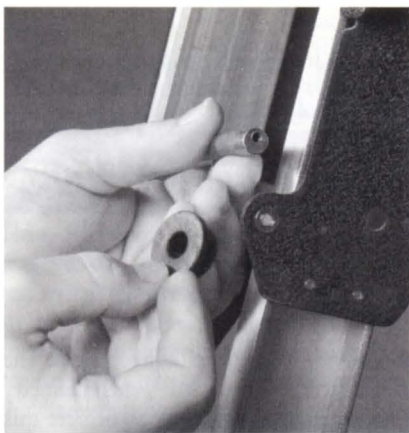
A plastic bushing is removed from one end of the shaft. Note that the mounting hole for the shaft is drilled off-center, providing adjustment for enlarger fore/aft alignment.
